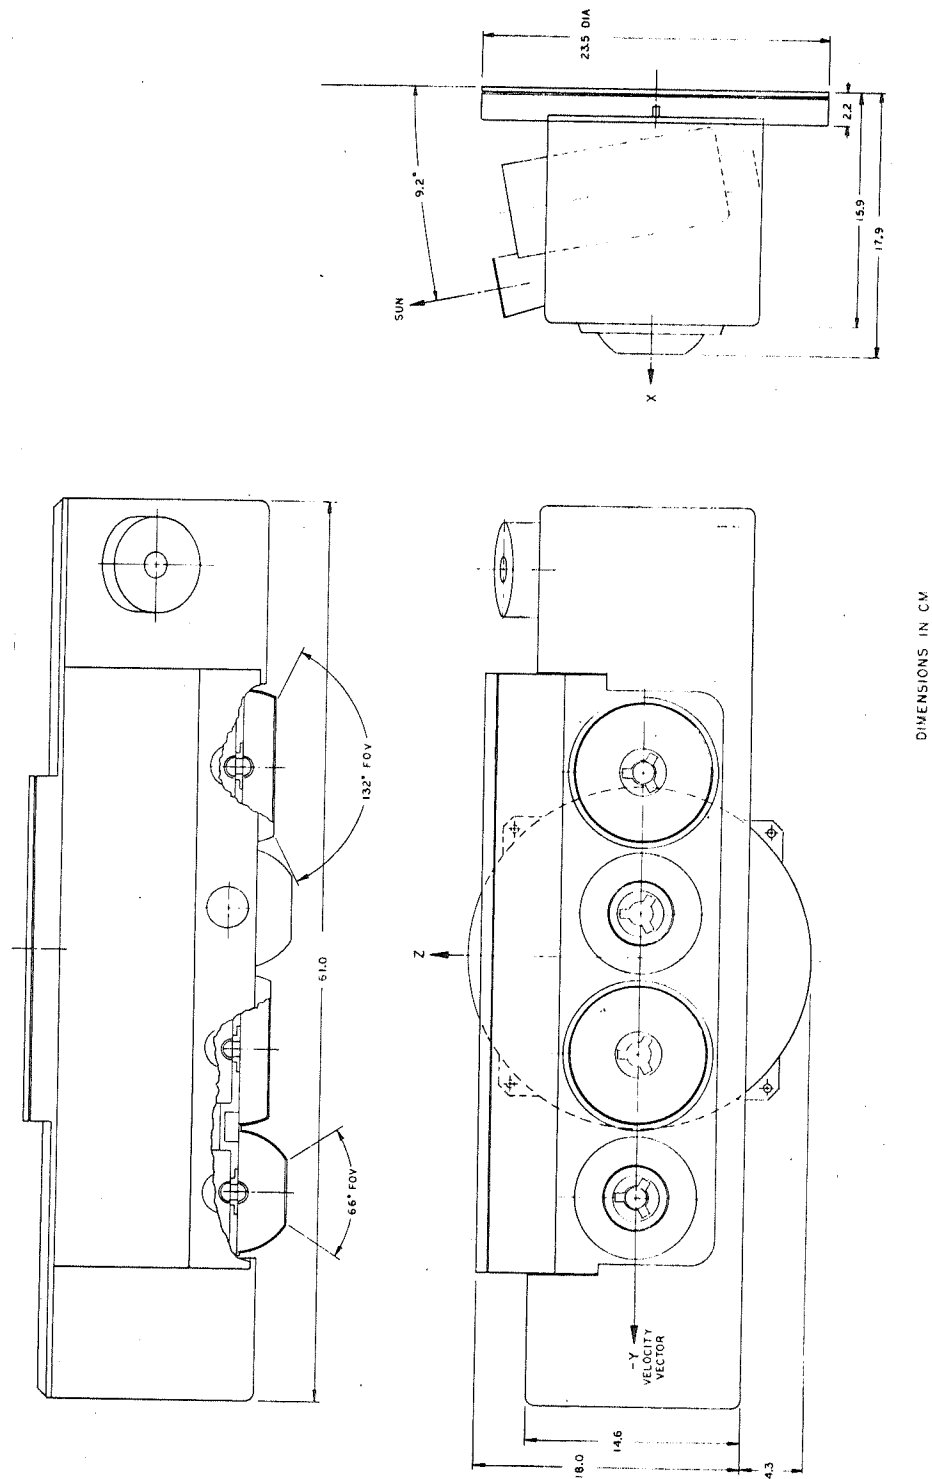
ERBSS Non-Scanning Instrument Layout
